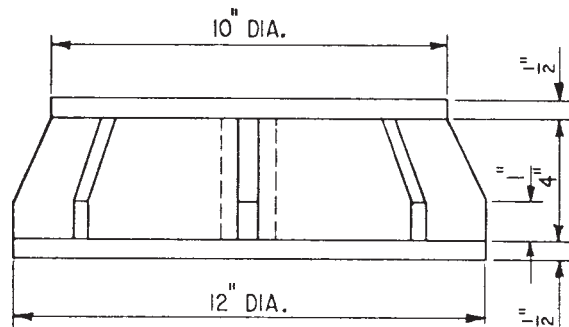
Rigid Bearing Plate for 12 in. Diameter Test
